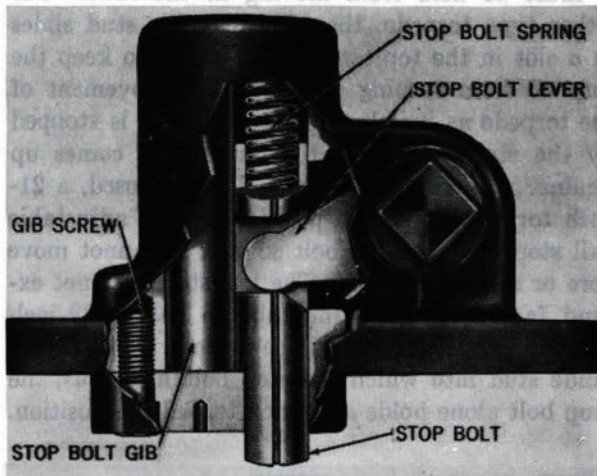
Stop Bolt Housing Assembly—Sectional View.
